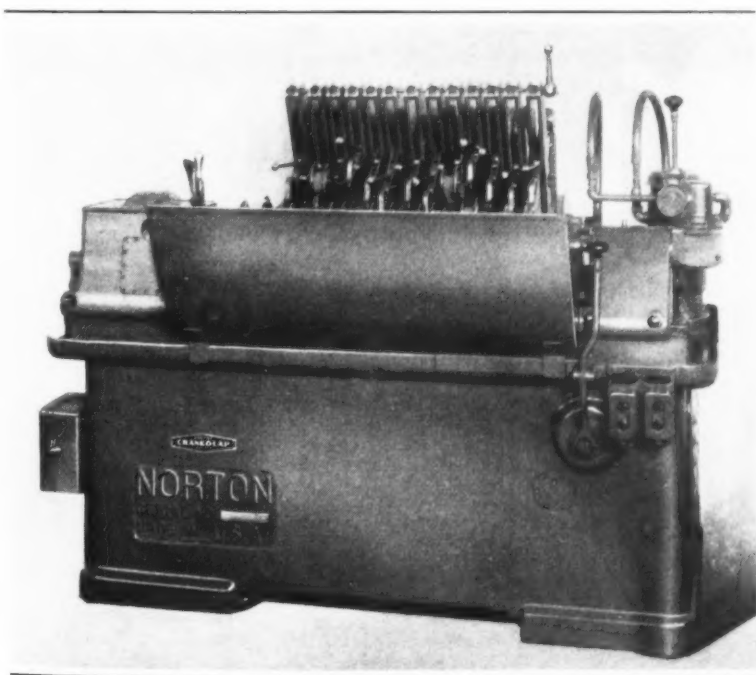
Norton "Crank-O-Lap" for Lapping All Bearing Surfaces of Automobile Crankshafts
